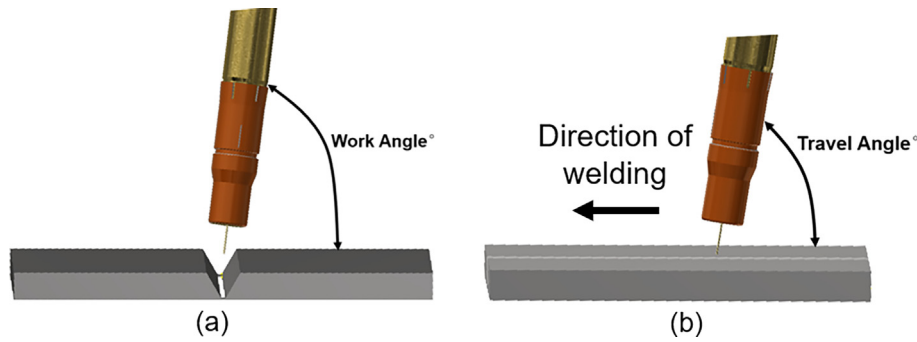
Orientation of the torch during welding: (a) Indicates the work angle of torch formed by a line perpendicular to the major surface of the workpiece and a plane determined by electrode axis and weld axis (b) The travel angle of the torch dictates the welding technique which can be forehand or backhand, based on the direction of the electrode relative to the welding direction [44].
